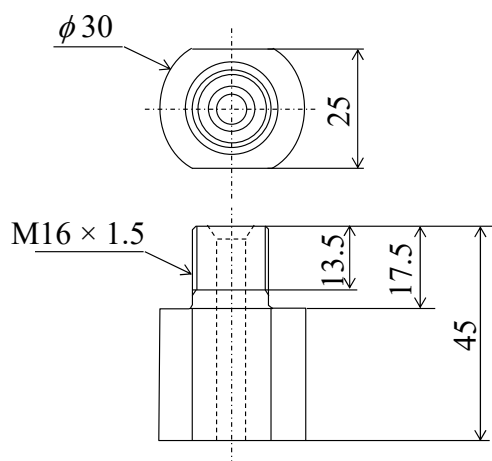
Shape and dimensions of screw part of SUJ2 (unit in mm).
